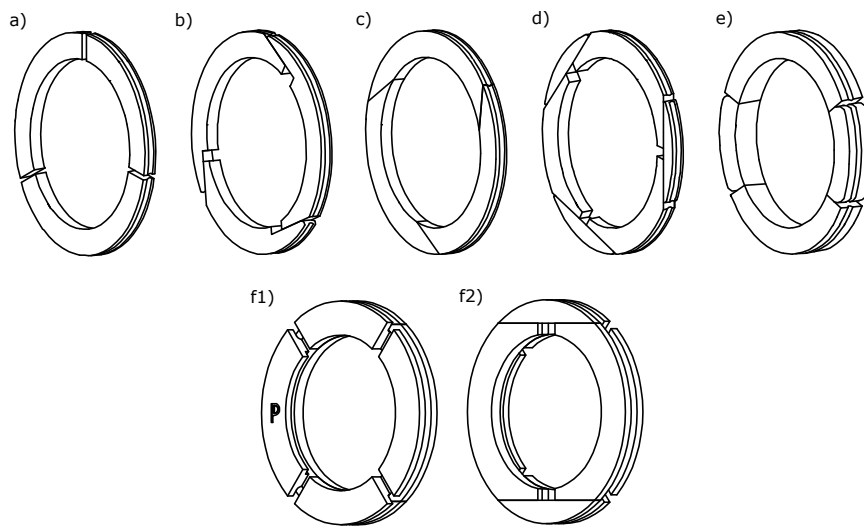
Typical designs of pressure packing rings: a) 3 piece radial cut ring, b) 3 piece tangential cut ring with wear stop, c) 3 piece tangential to rod cut ring without wear stop, d) 6 piece tangential cut ring, e) 4 piece ring design f) balanced cap design (BCD) ring (f1 shows the pressure side, f2 the sealing side) [3].
